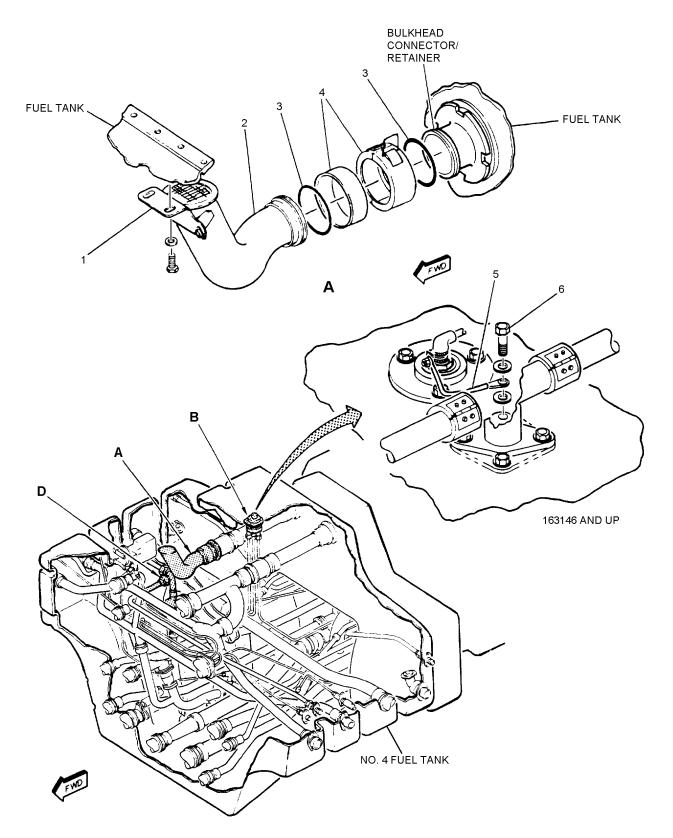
Wing Damage Fuel Shutoff Valve (5L-R110) (Sheet 1)
